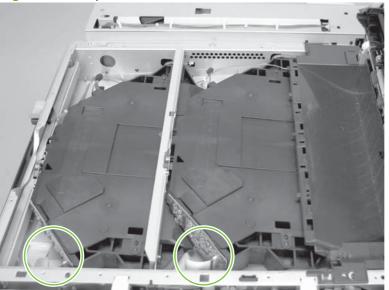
Remove the laser/scanner assembly (yellow and magenta) (3 of 3)
